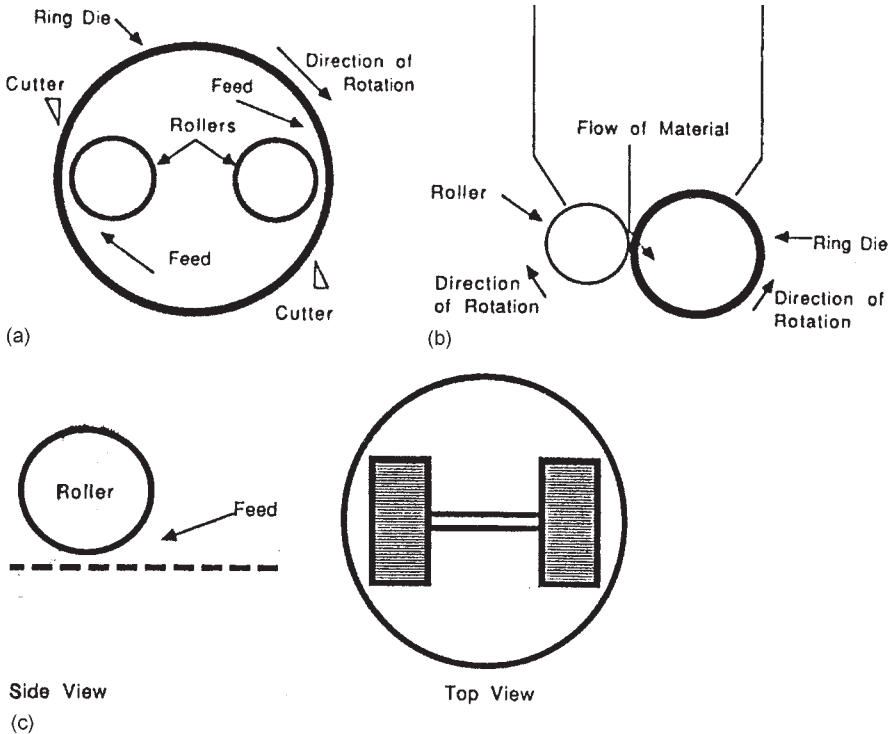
Roll-type extruders. (a) Pellet mill with internal roller; (b) pellet mill with roller external to die; (c) pellet mill with rollers on flat die plate.
